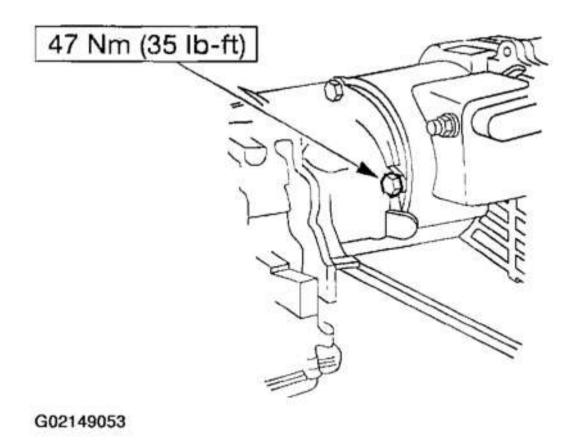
Installing Transfer Case-To-Transmission Bolts
